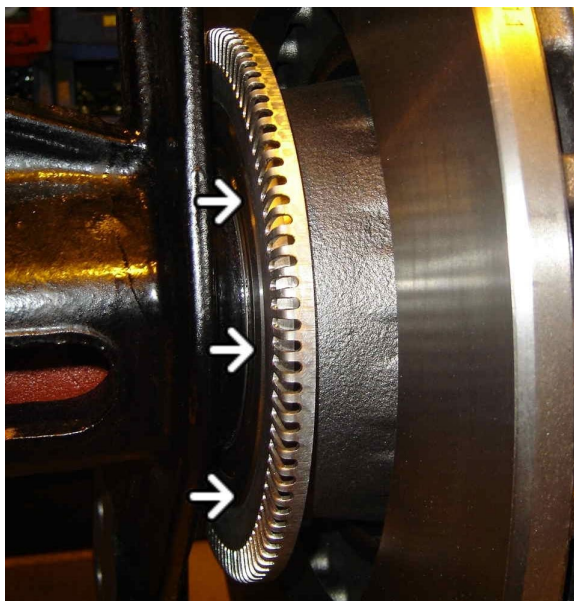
NO PLAY BETWEEN THE BEARING AND THE SPINDLE SHOULDER
